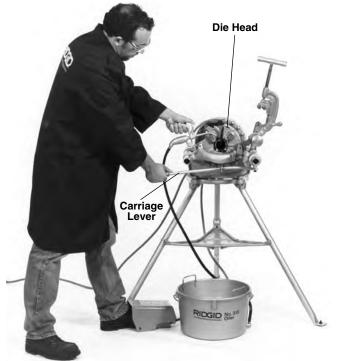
Threading Pipe with Quick or Self-Opening Die Head
